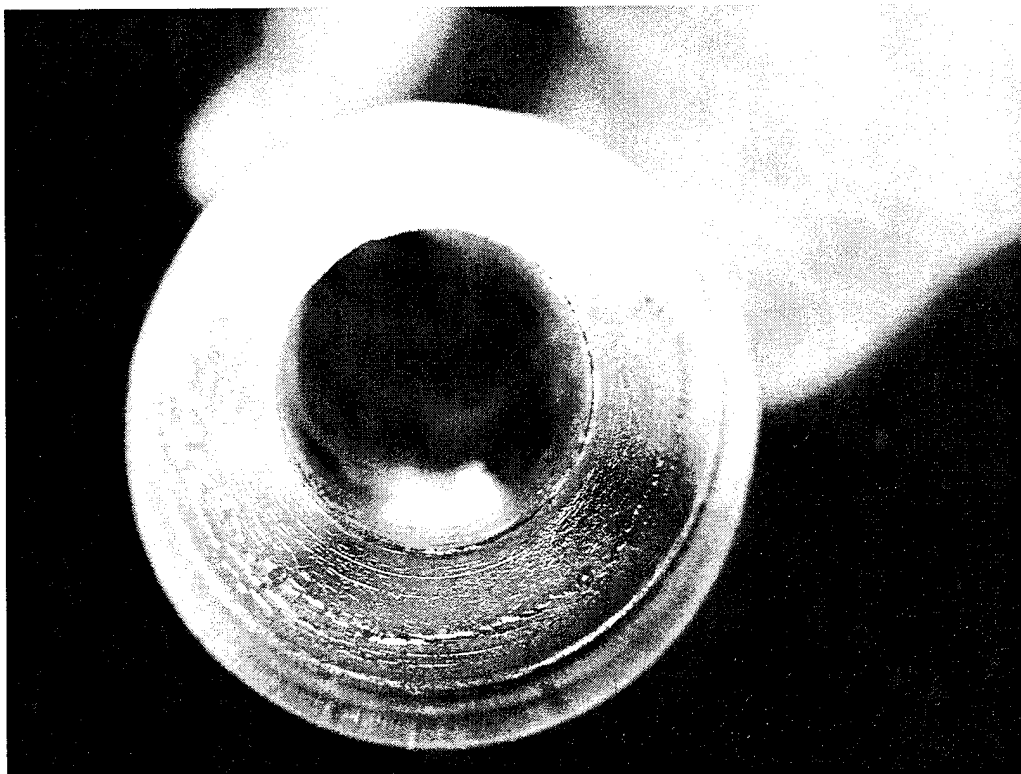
Commercial wide angle light pipe head surface damage, detail 3.
